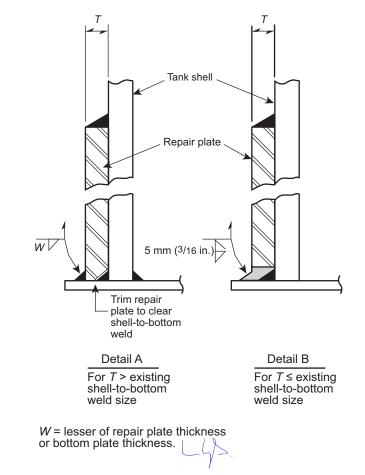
Lapped Patch Repair Plates at the External Shell-to-bottom Joint
